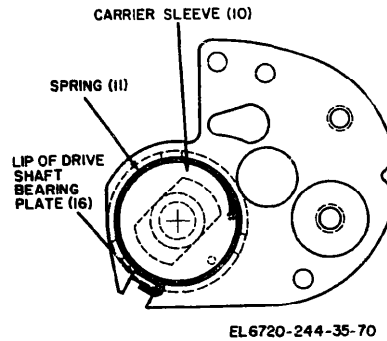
Spring location (spring 11) from fig. 3-14).
